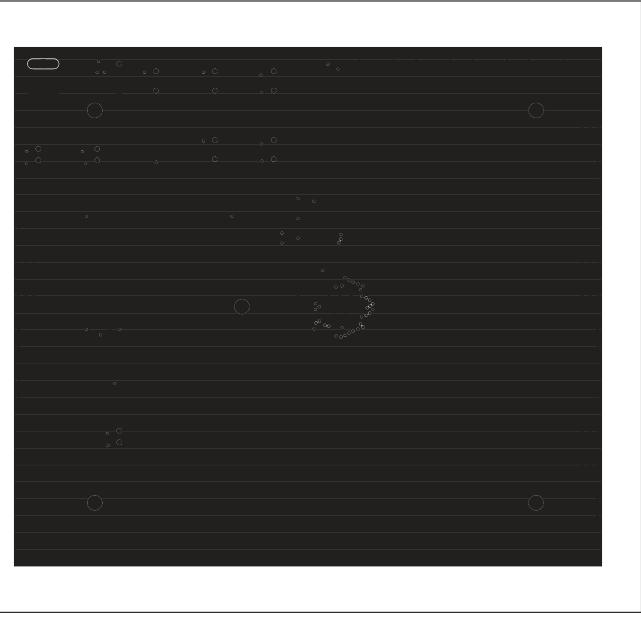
MAX3673 EV Kit PCB Layout—Ground Plane
